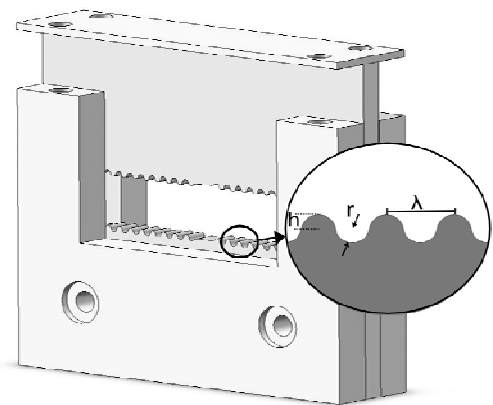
Schematic view of the moldforms' design. For dimensions see Table 1.
